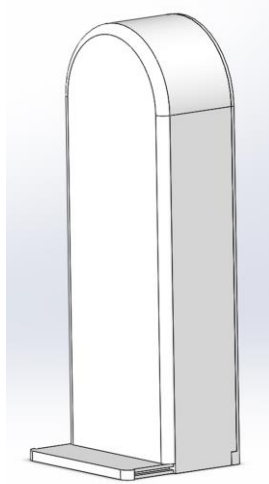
Bottom casing piece sliding into place to enclose the pulleys
